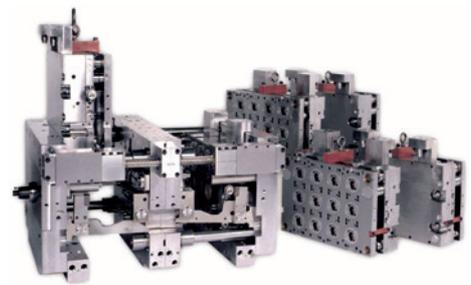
A 4-level mold designated to quickly switch to different sets of inserts (Courtesy: Stackteck)
